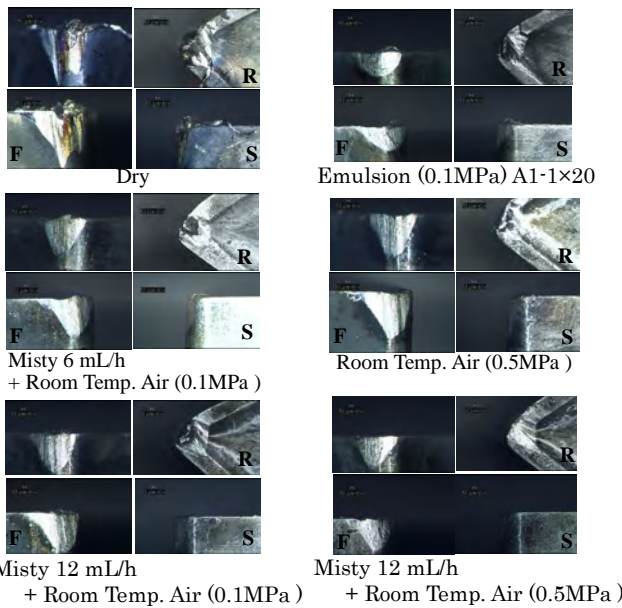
Close-up views of the flank wear land and the crater wear at 600m cutting length with HW-K10 cemented carbide inserts
